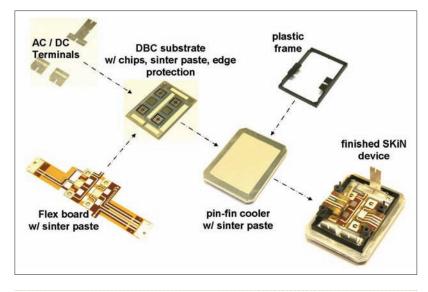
Exploded view of a 400 A, 600 V dual IGBT device comprising heat sink, DBC substrate with IGBT and FWD chips, flex board and power terminals - all being connected by silver sintering technology
